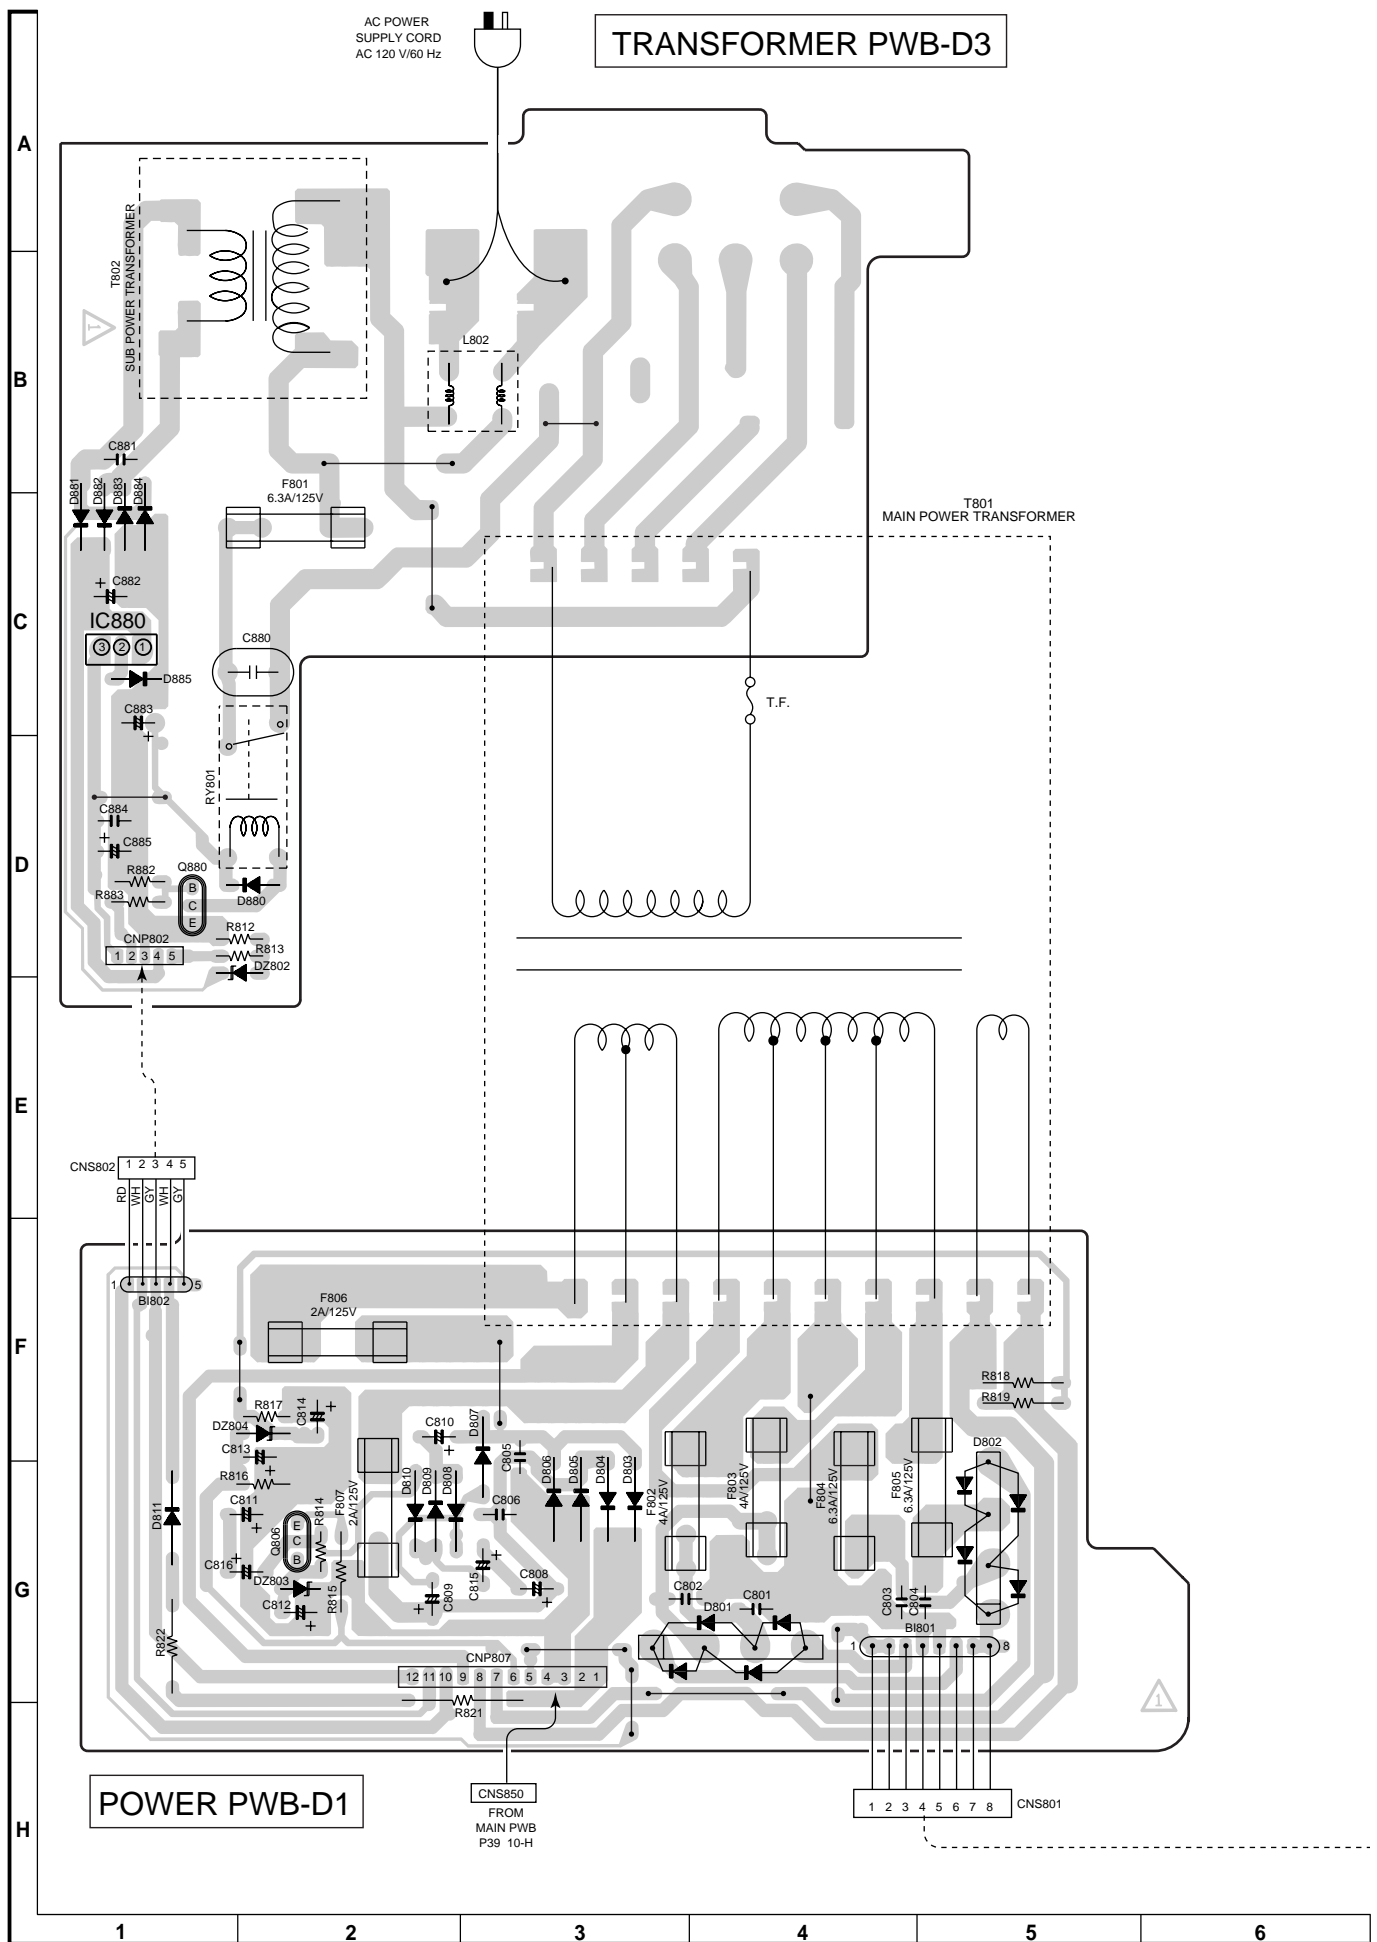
WIRING SIDE OF P.W.BOARD (5/10)
